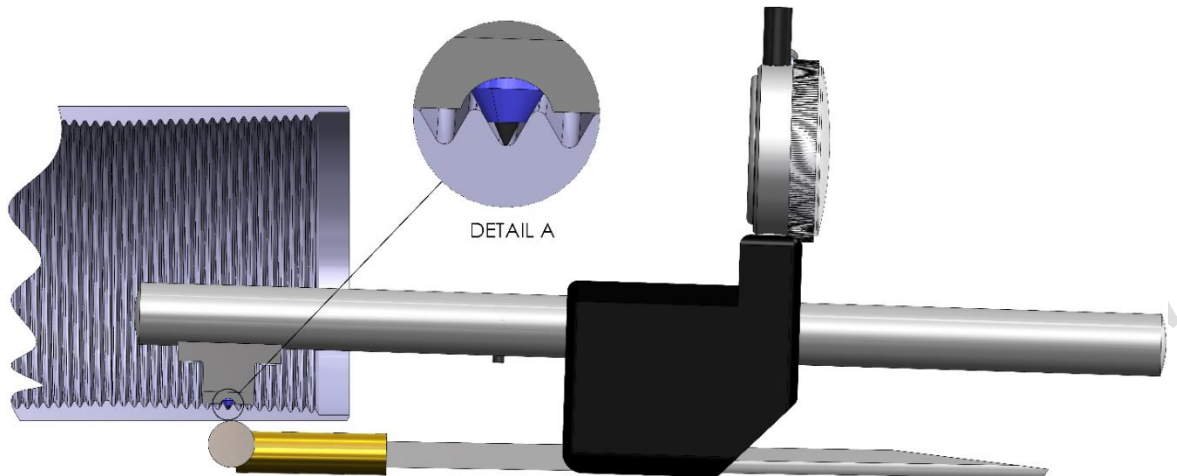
Internal Thread Height Gauge on Coupling Threads (Round Thread Height Gauge)
